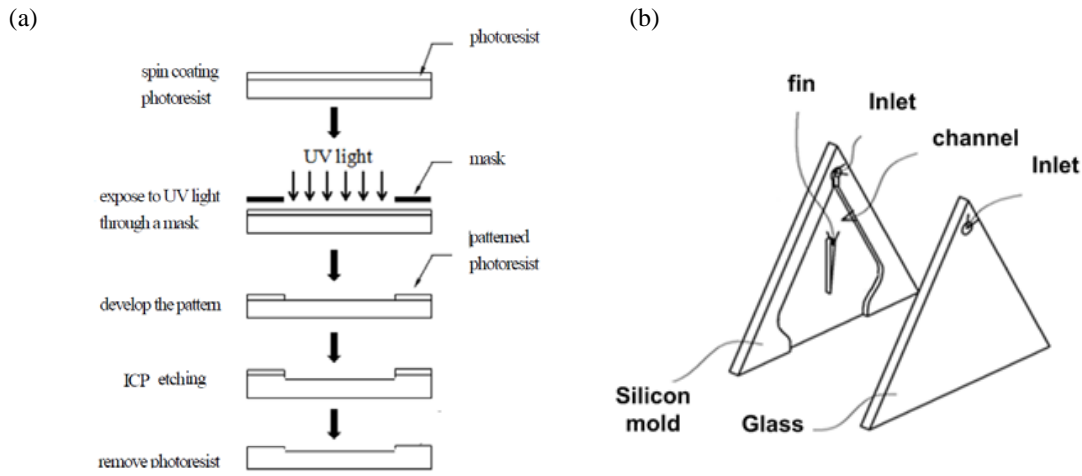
(a) fabrication process and (b) the assembly of a new slot coater [3]
